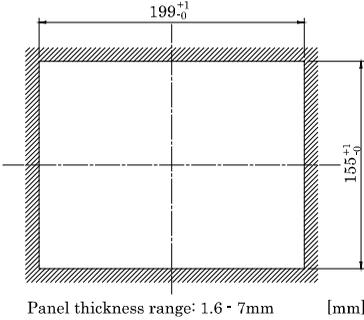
FPD-S71VT-DC1 [6.5 inches] Panel Cut Dimensions and hole position for stud
